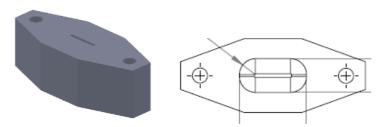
Extrusion slit die (19 mm × 2 mm)
